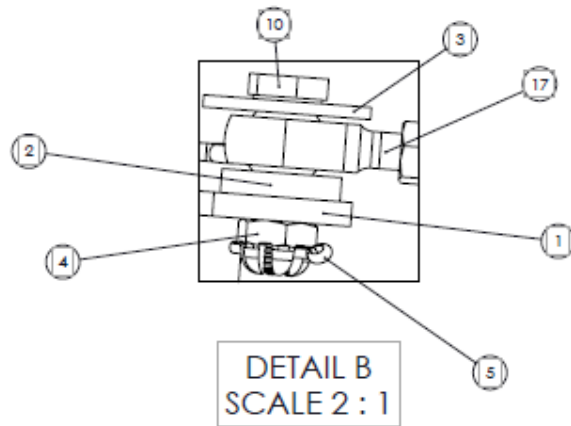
PUSH PULL TUBE ATTACHMENT AT SERVO ARM
